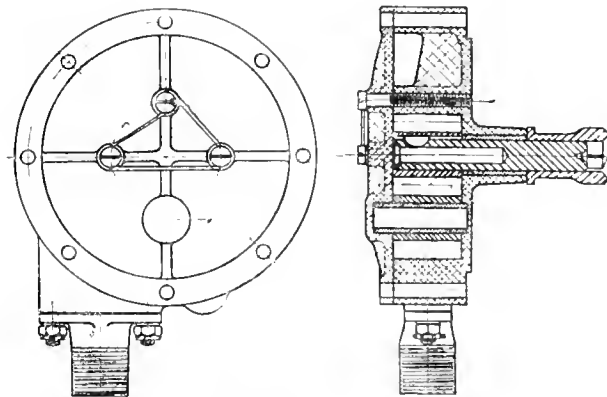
OIL-SUCTION-PUMP ASSEMBLY
